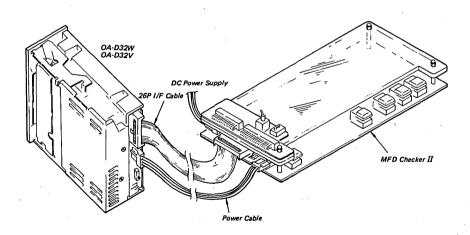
Drawing of Connection Between Disk Drive and MFD Checker II
